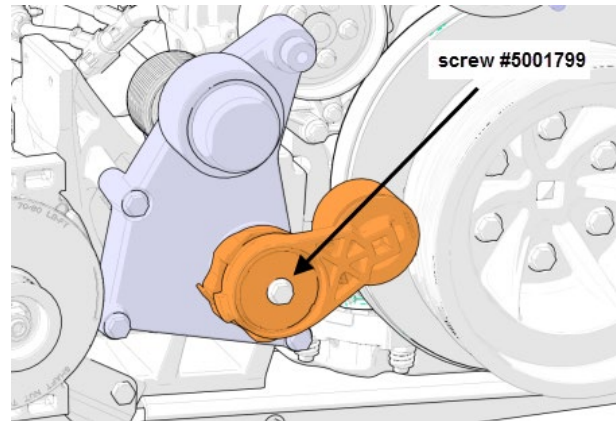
TENSIONER MOUNTING SCREW TORQUE : 48 LB-FT
